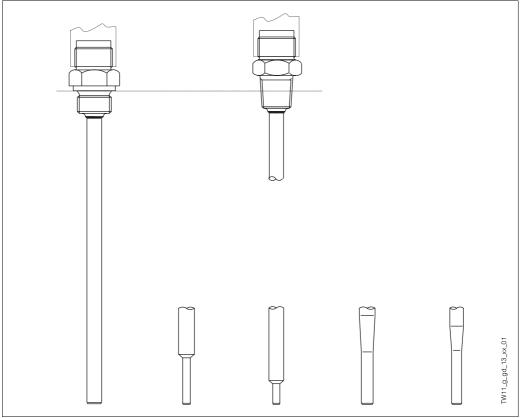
TW 11 with several types of process connections and end parts of the thermowell
